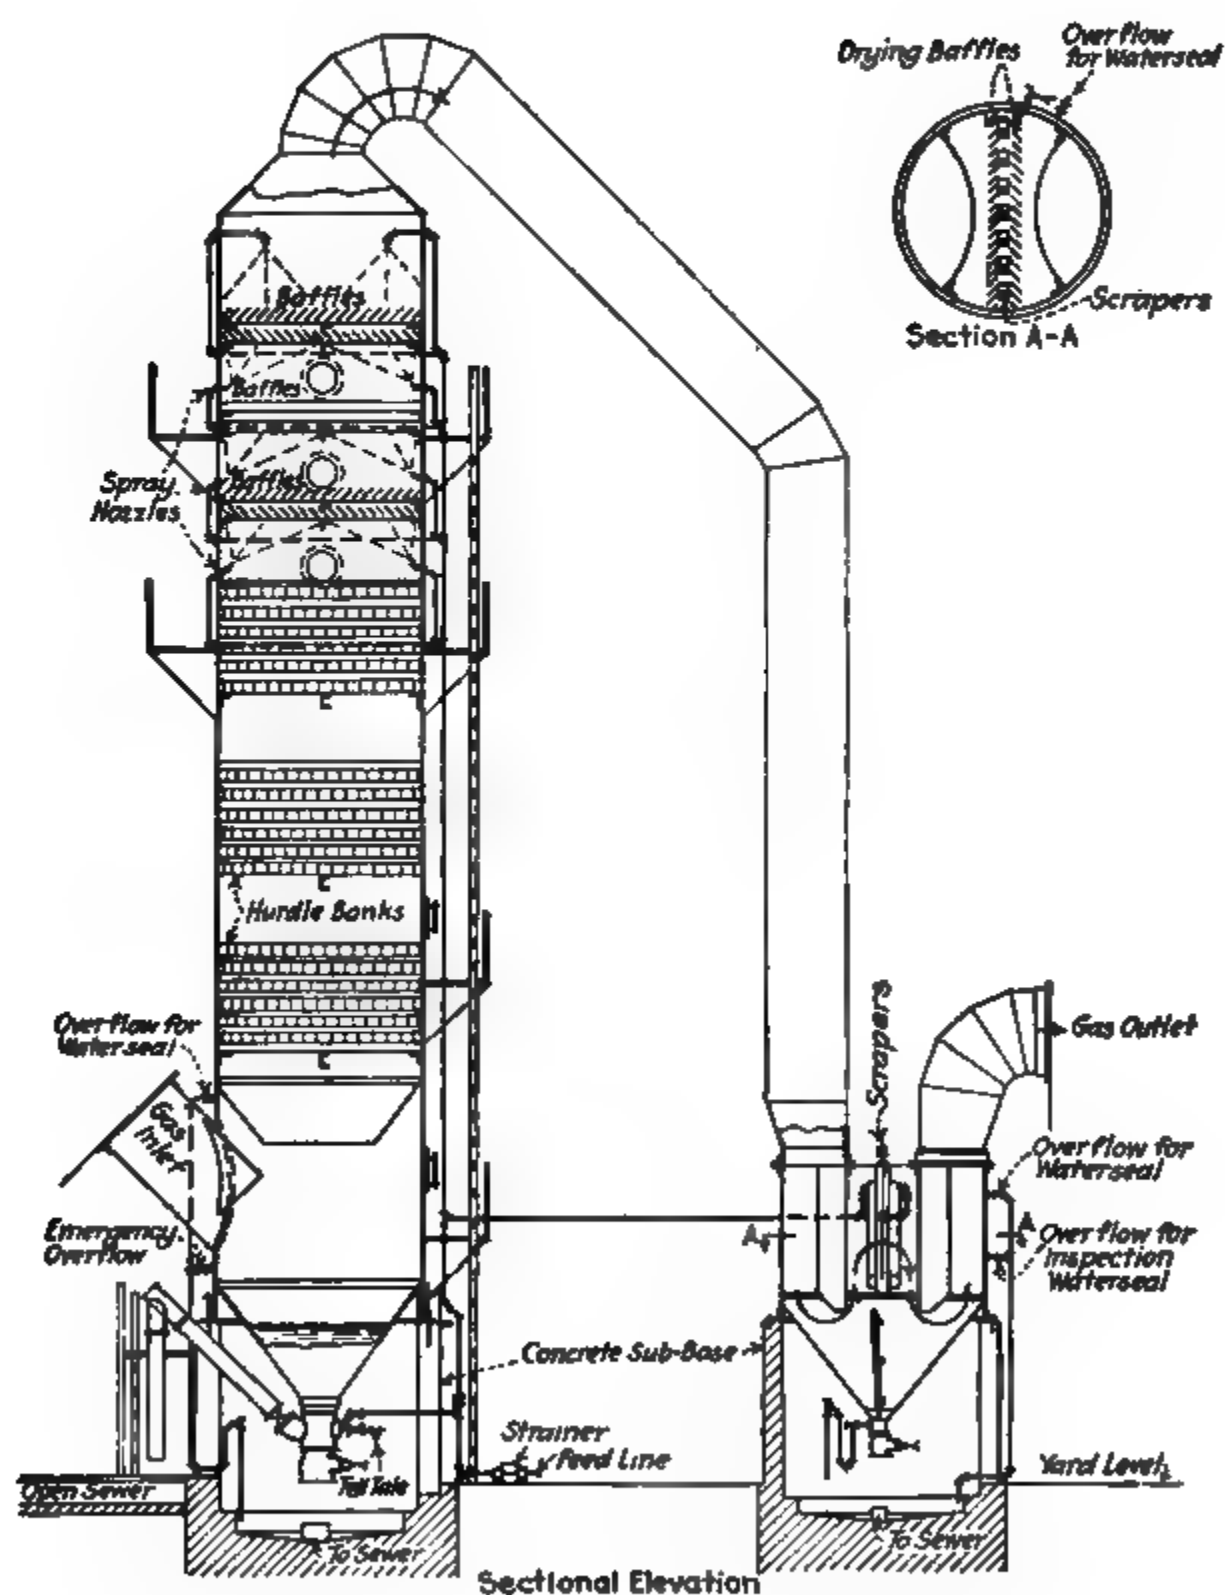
Typical general arrangement of Brassert gas washing and drying system.
